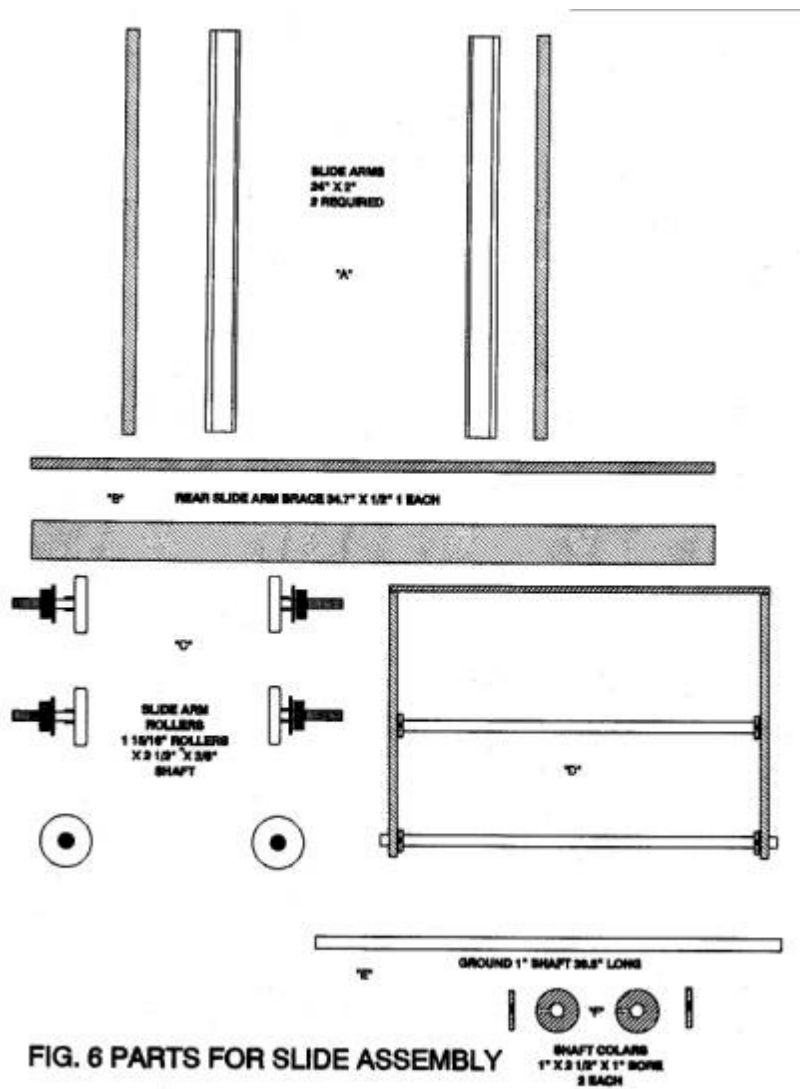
PARTS FOR SLIDE ASSEMBLY
